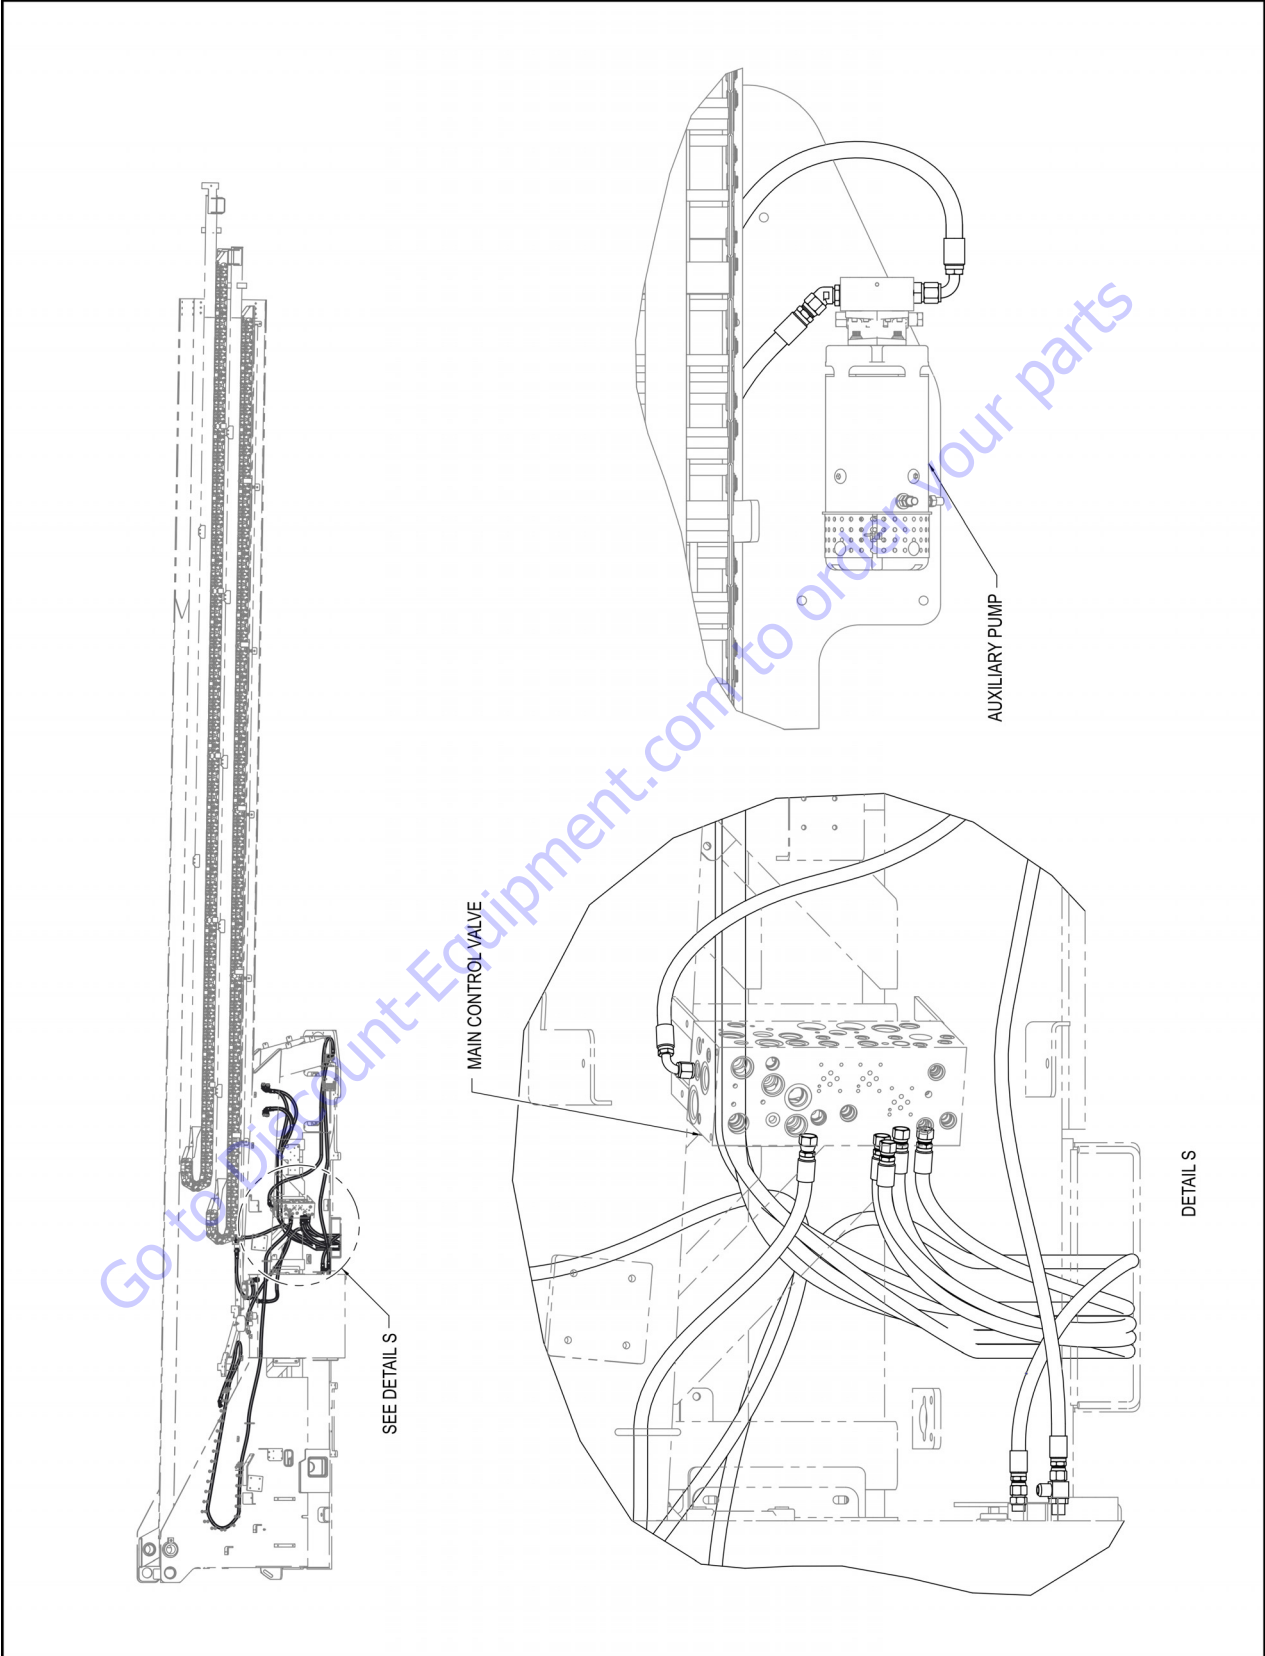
Hydraulic Hose Installation - Sheet 5 of 8
